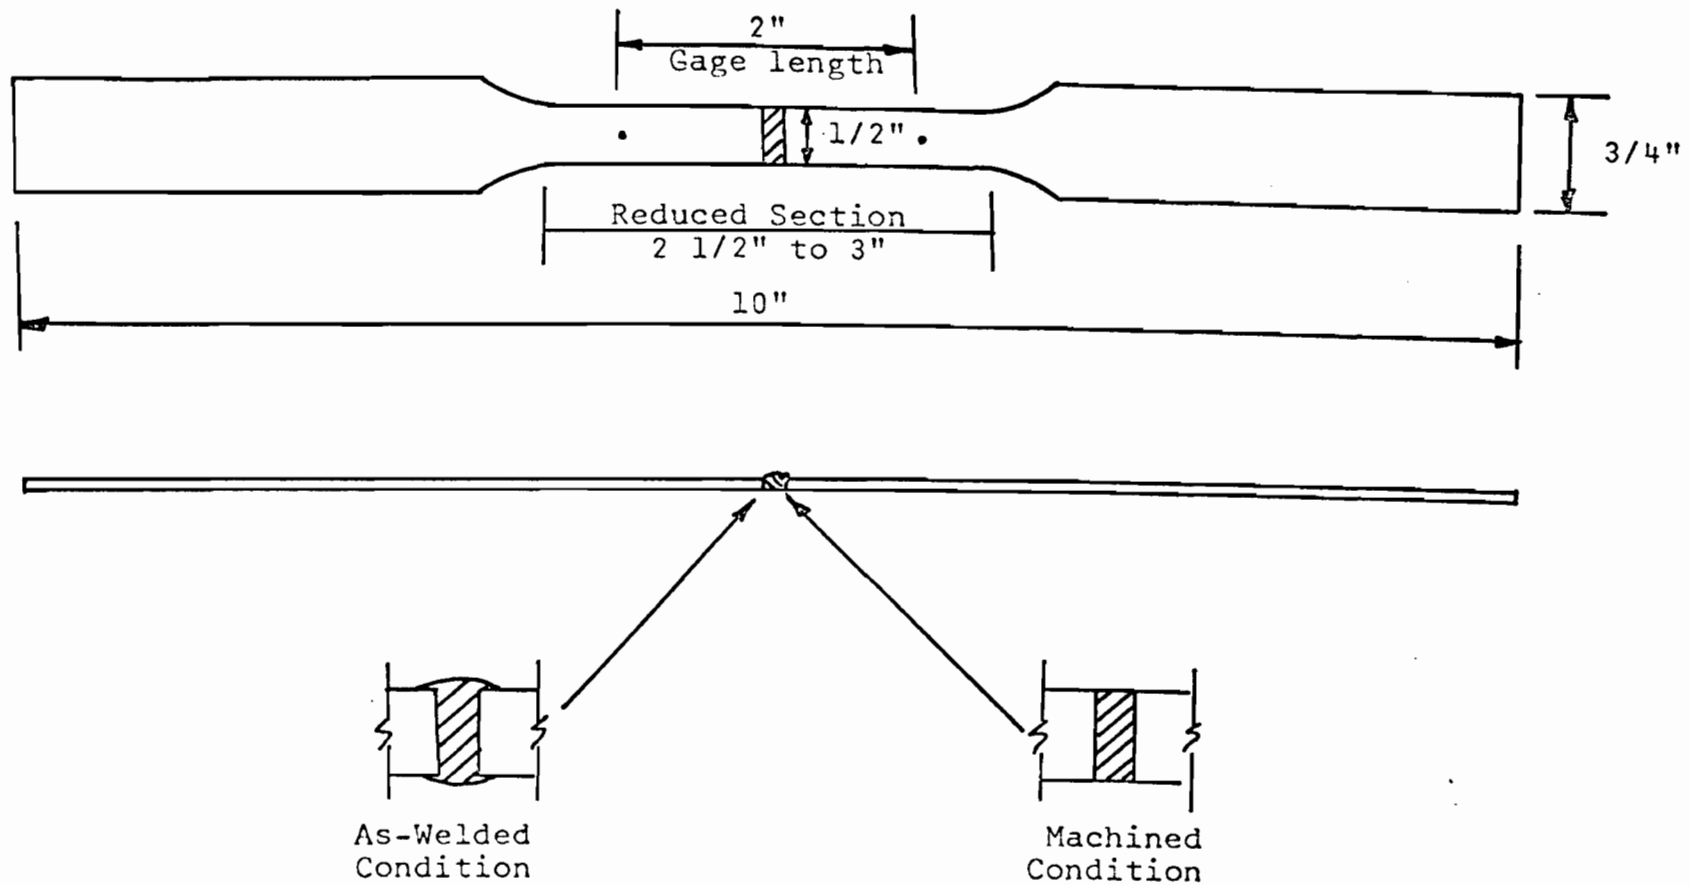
Typical Butt-Joint, Groove-Welded Specimen
